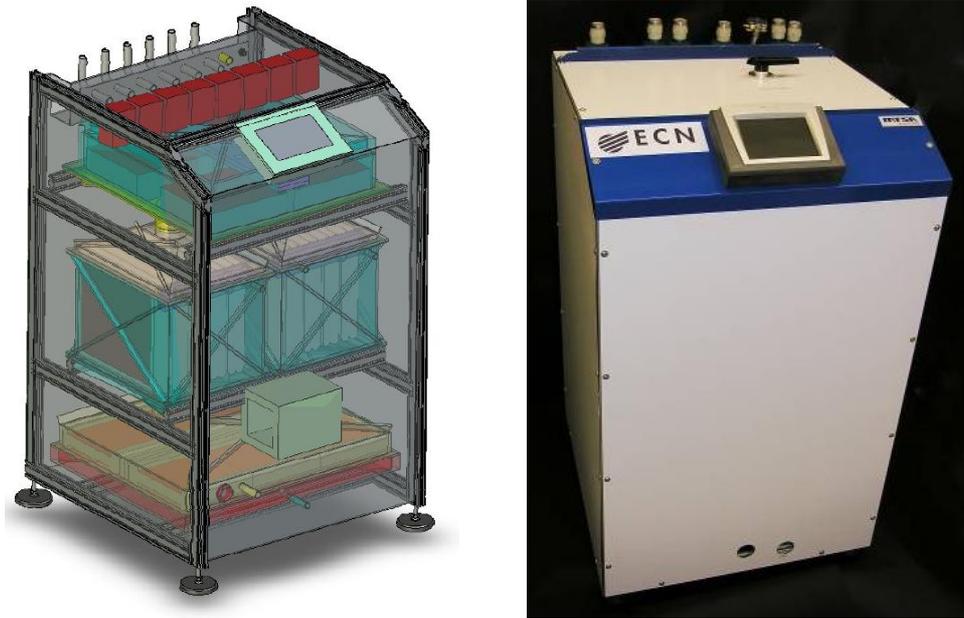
Design drawing and picture of the ECN 2.5 kW adsorption chiller
